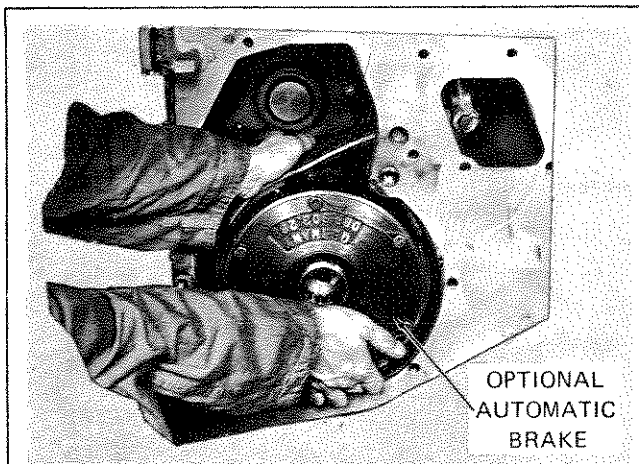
Reassembly And Installation Of Oil Brake Assembly, Power Controlled Winch (Sheet 2 of 2)
